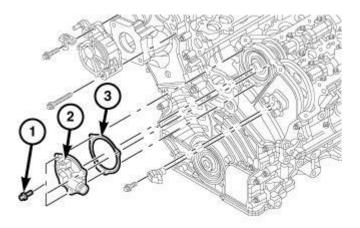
Oil Breather/Camshaft Seal Housing & Camshaft Seals Courtesy of CHRYSLER GROUP, LLC
